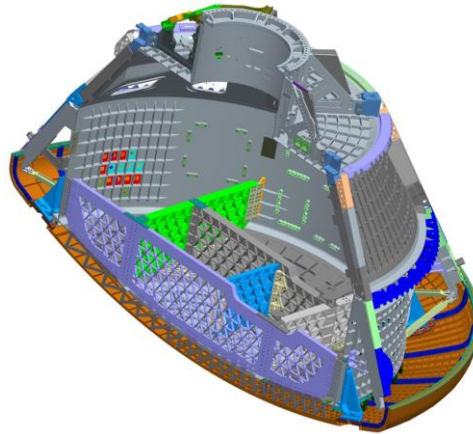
Cross section of the MPCV showing the backbone backing structure integral to the design of the load sharing truss design.
